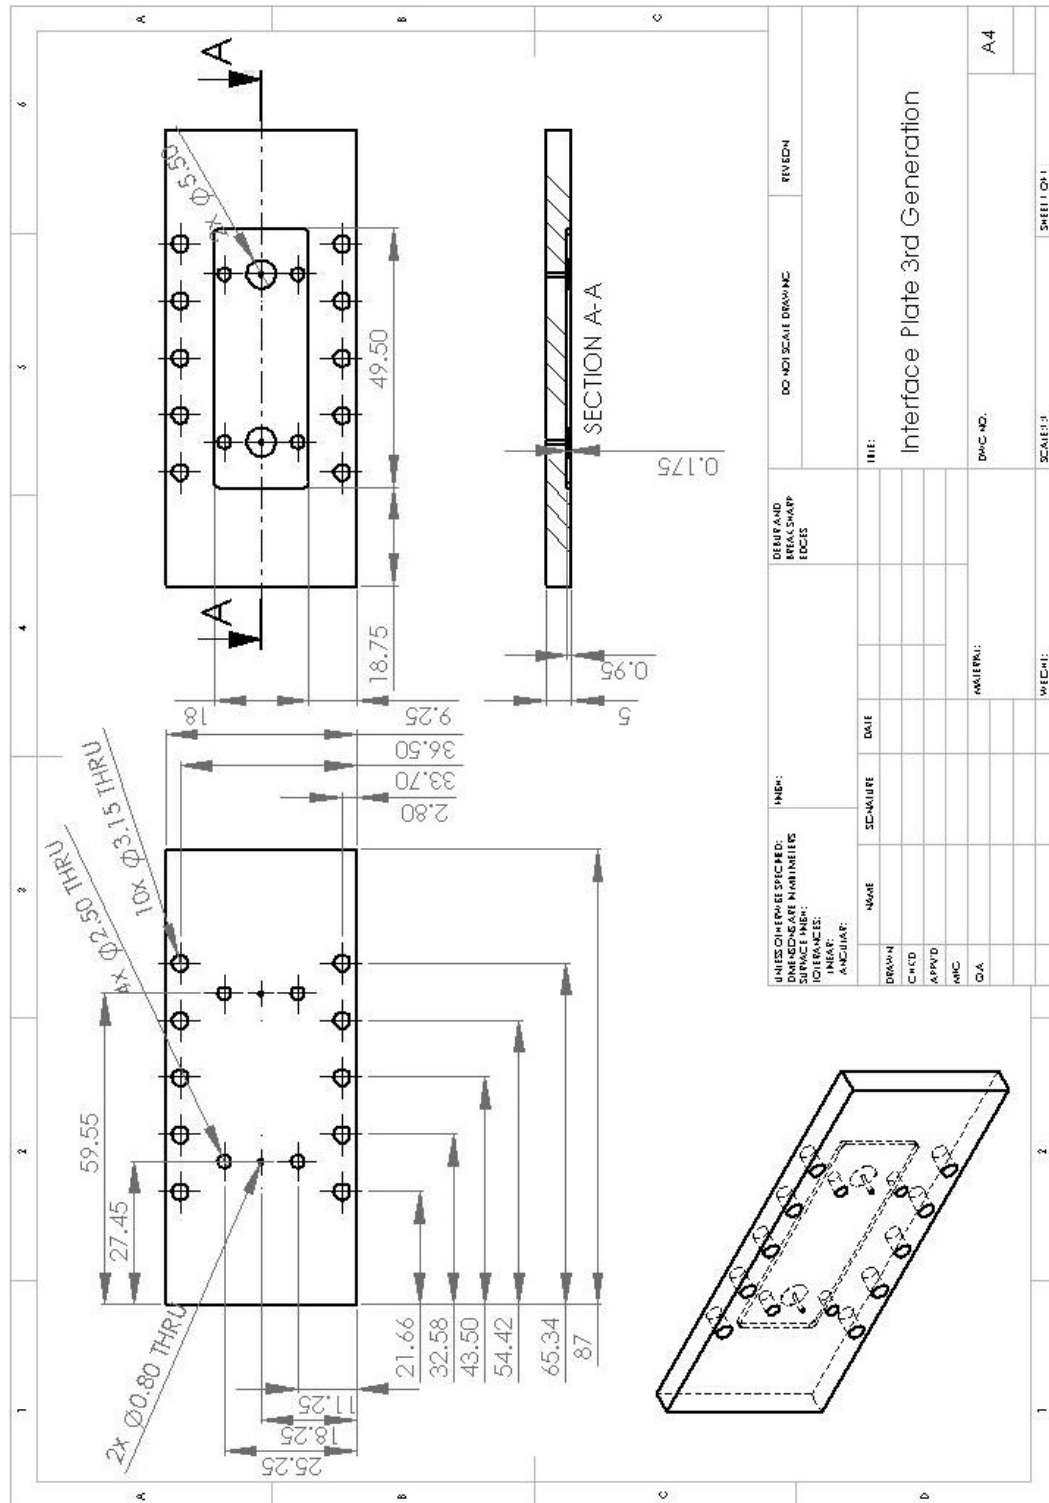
Interface plate for the third generation packaging system - Dimensions in mm.
